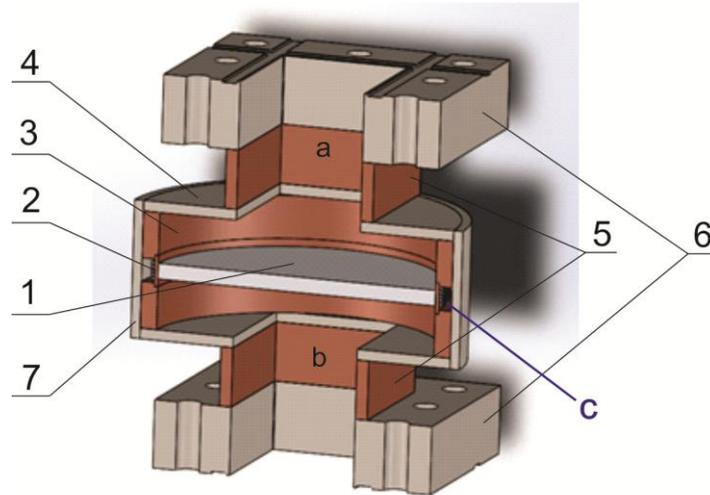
The section view of the pillbox type RF window (schematic view).
